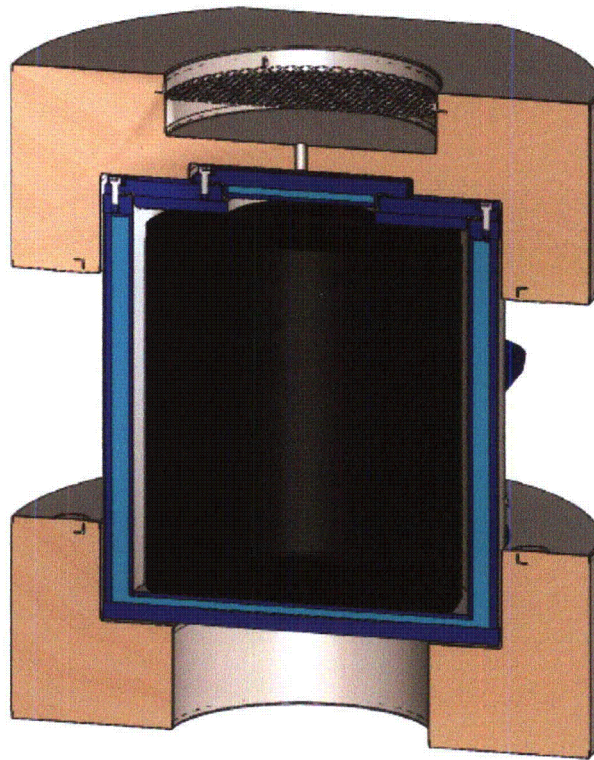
WMG 150B Cask Package Cutaway
